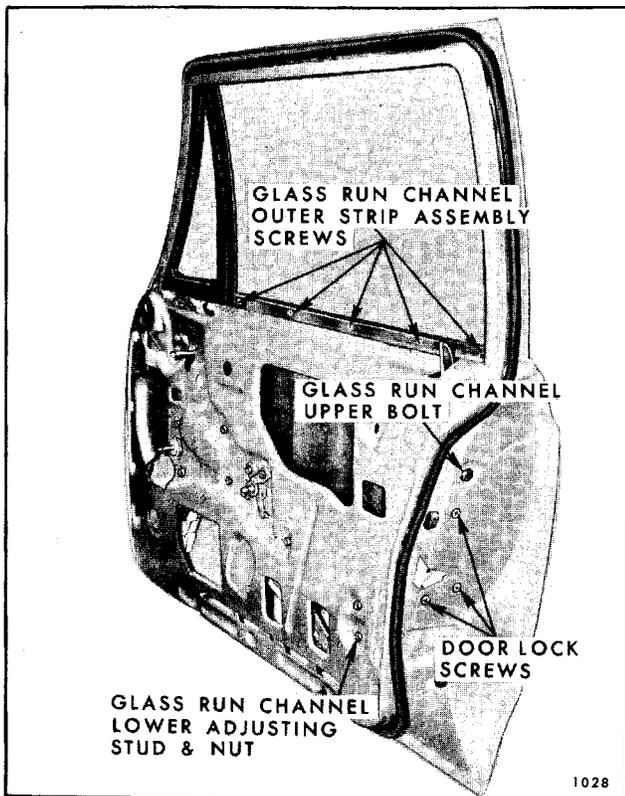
Door Hardware Attachments - "B" Closed Styles
